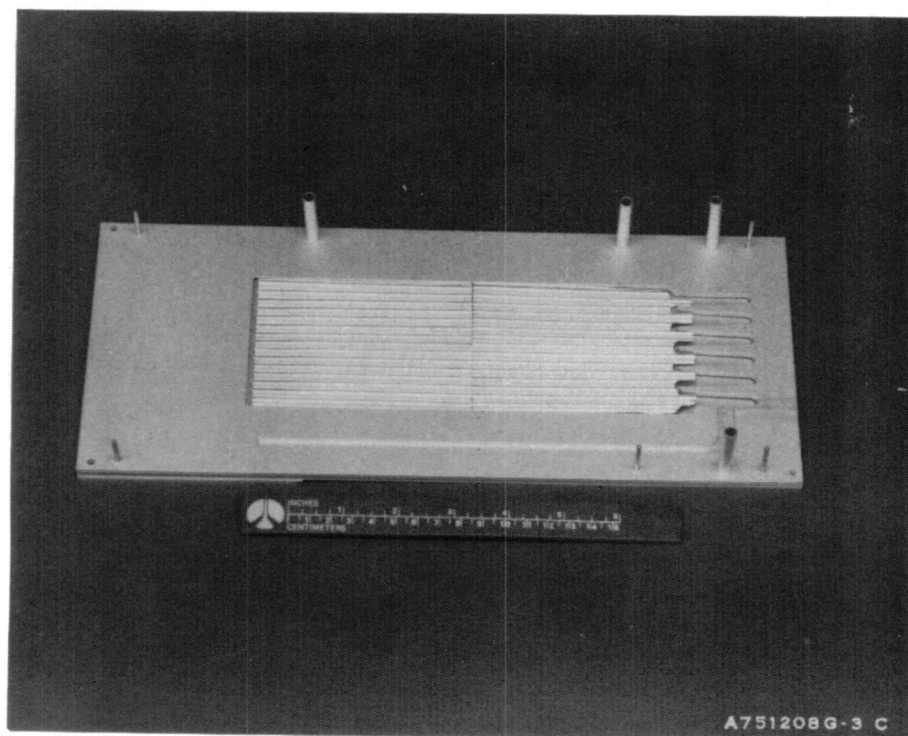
Panel Corner Specimen (PCS)—Specially Machined Core Sections Fit around "Fingers" of Frame
